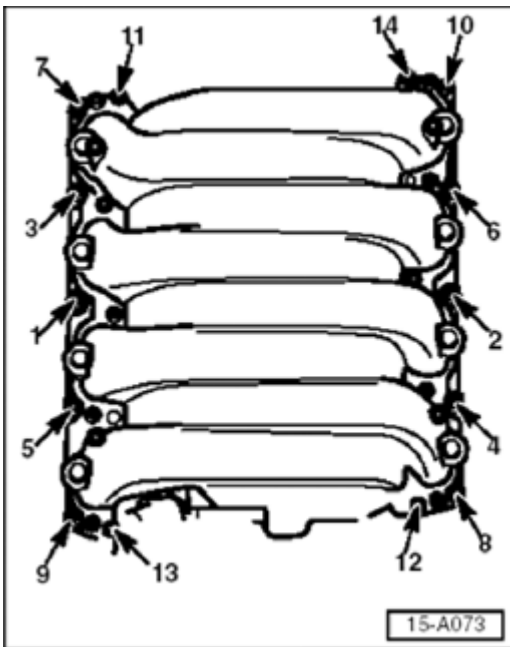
Tightening Intake Manifold Bolts In Stages And In Sequence
